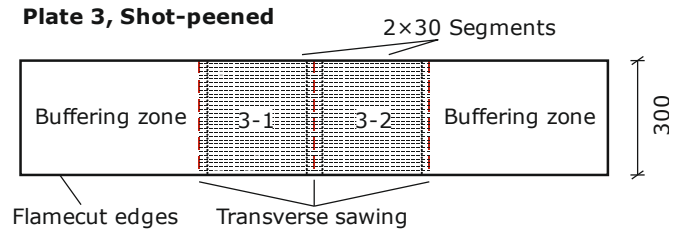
Dimensions of the specimens for the sectioning method, dimensions in [mm]
